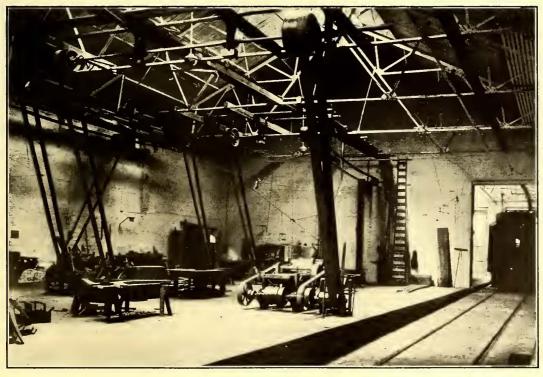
WOODWORKING MILL, WITH DEPRESSED TRACK LEADING TO THE STOREROOM
